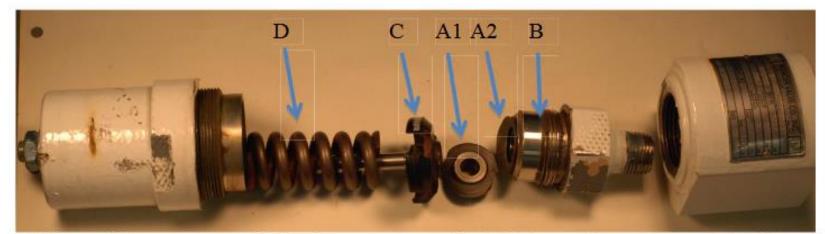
pressure relief valve components: failed nozzle subassembly (A1 and A2); inlet base (B); disk subassembly (C); set spring (D).
